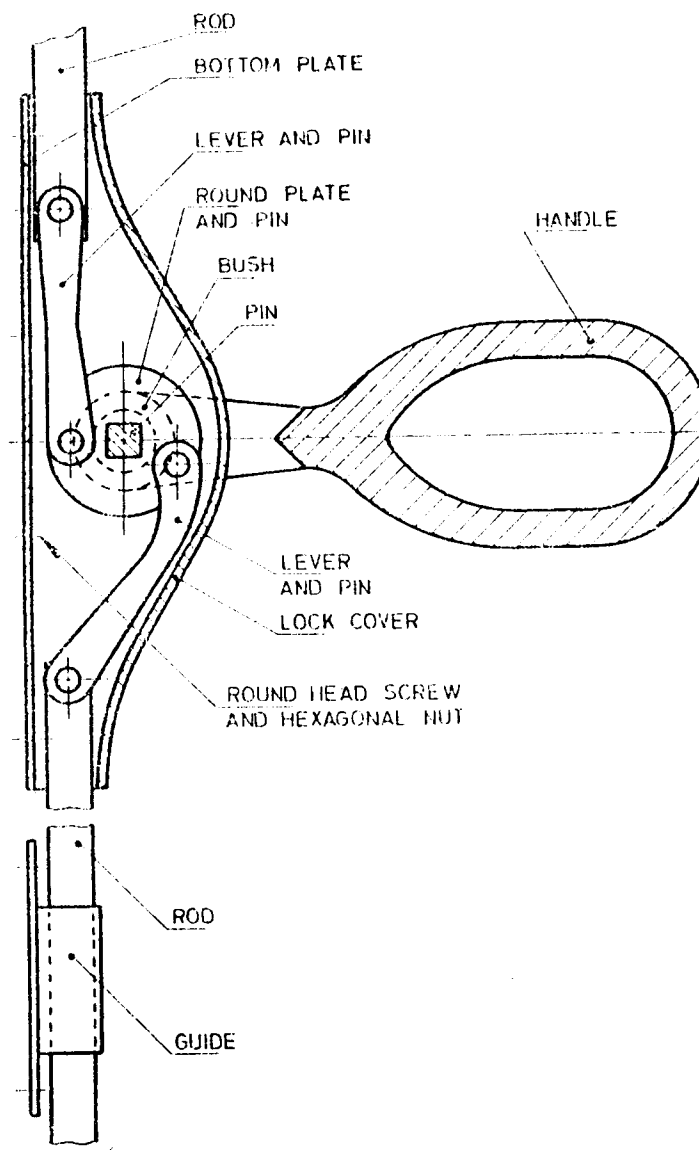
TYPICAL LATCHING ARRANGEMENT
